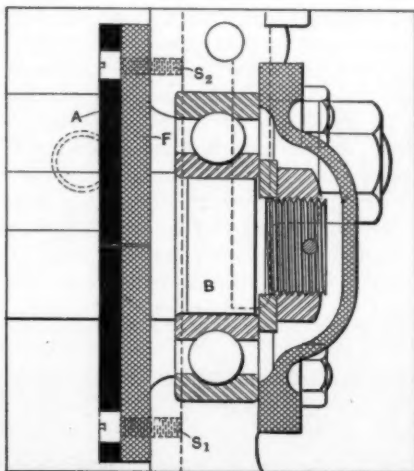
Showing an annular type ball bearing at one end of the gearshaft and a scheme of packing to keep vaseline within the ball bearing and to exclude chips from the gears
